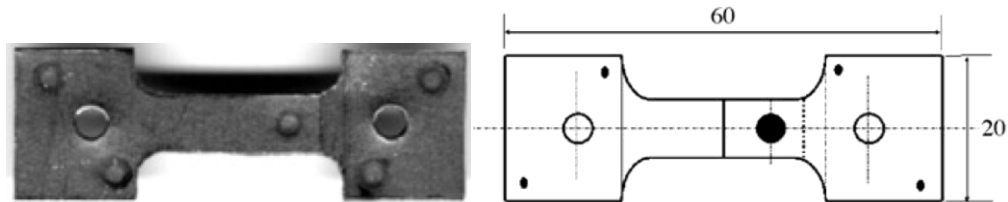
Developed impact-tensile specimen for RSW joints [163].
